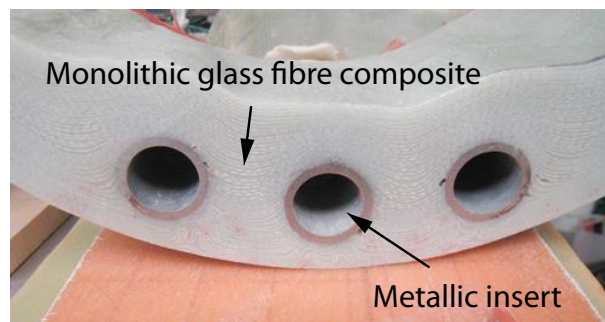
Root section of a wind turbine blade, which is produced with molded-in inserts. [Gardiner, 2012]
